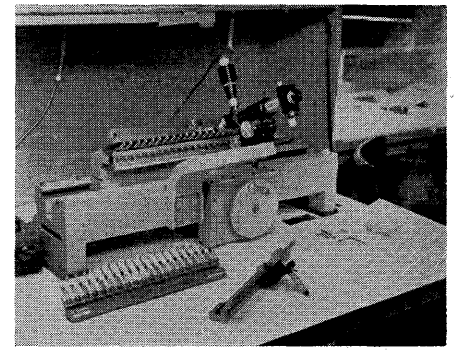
Pivot aligning fixture, and bar holding 20 head mounts
